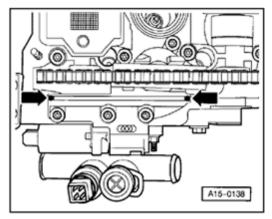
Chain Tensioner Or Camshaft Adjuster/Cylinder Head Contact Surfaces Sealant Application Areas
